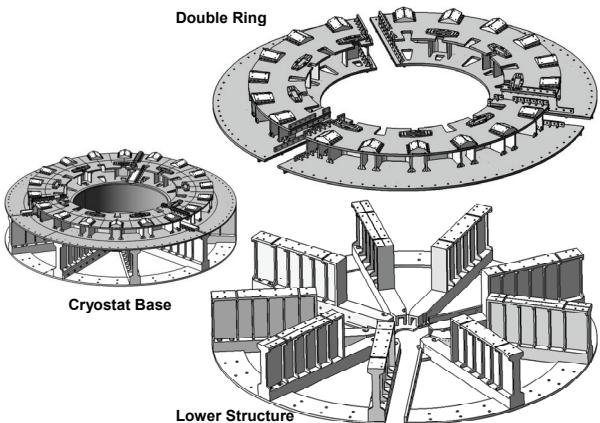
CB consists of double ring and lower structure [9], whose radial beam is a first part fabricated .
